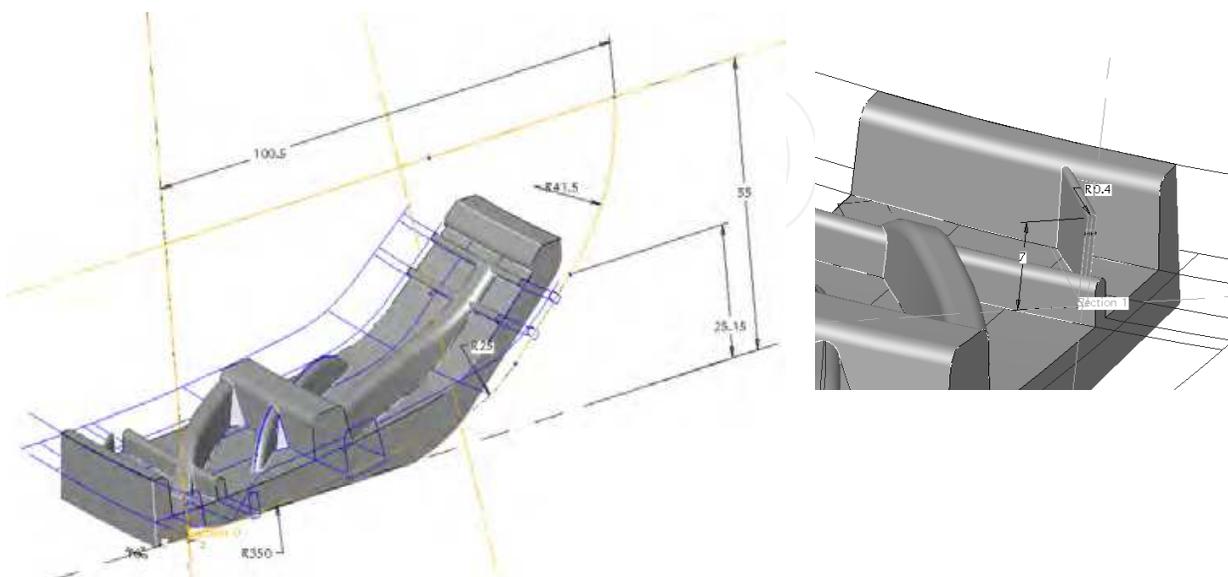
Dimensional range of geometrical features of the tread ring segment.
